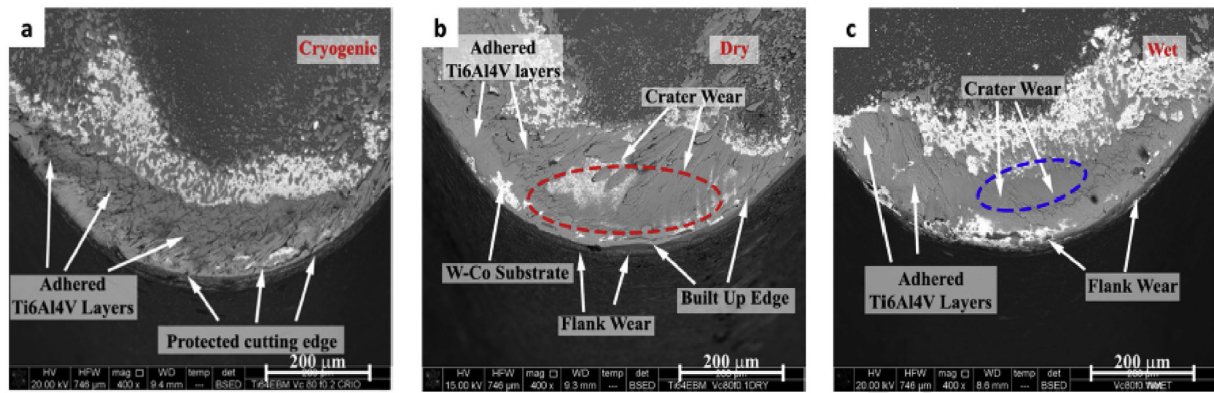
Images of tool worn faces after 15 min when turning EBM Ti–6Al–4V at 80 m/min of cutting speed and 0.2 mm/min of feed rate under a) cryogenic cooling, b) dry machining, and c) wet machining [77].
